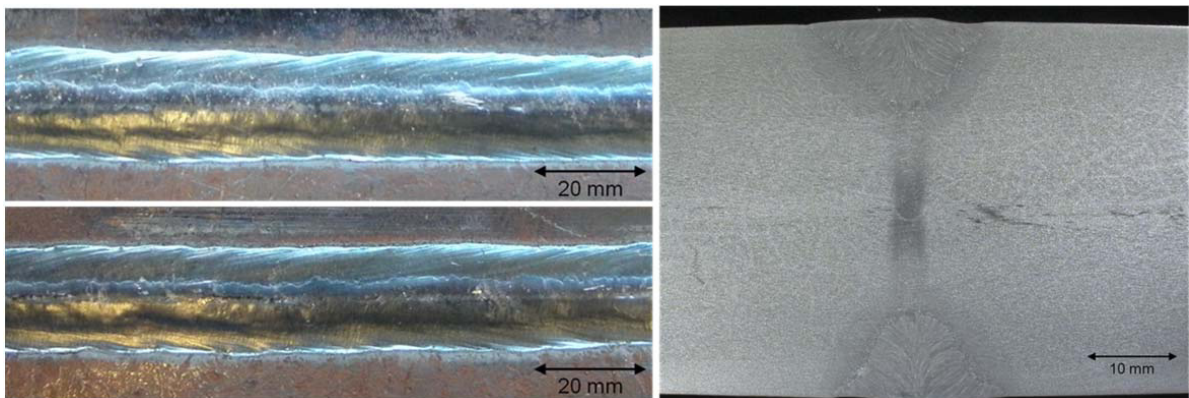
P265GH, 40 mm – Weld Seam Appearance (left) – Cross-Section (right).
